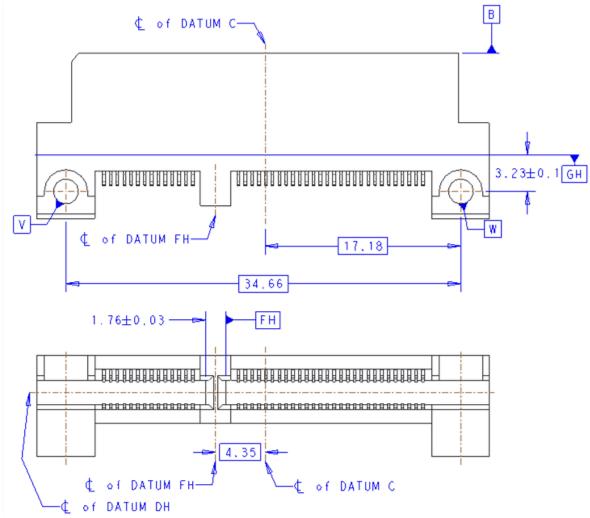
2C STRADDLE MOUNT CONNECTOR DIMENSIONS - REAR VIEW (MM)
